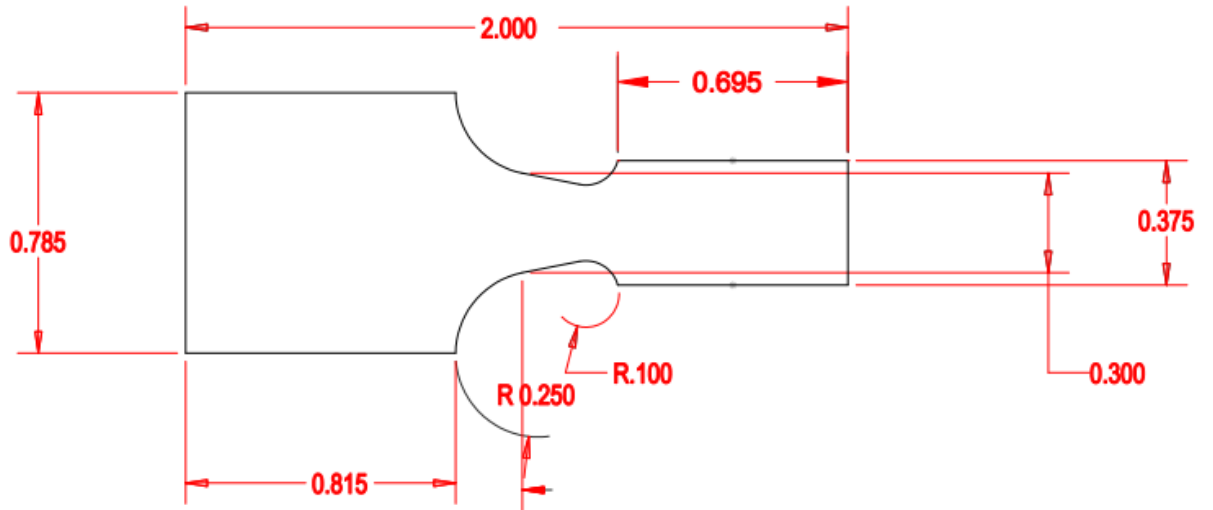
Sketch of specimen type-2 (all dimensions are in inches).
